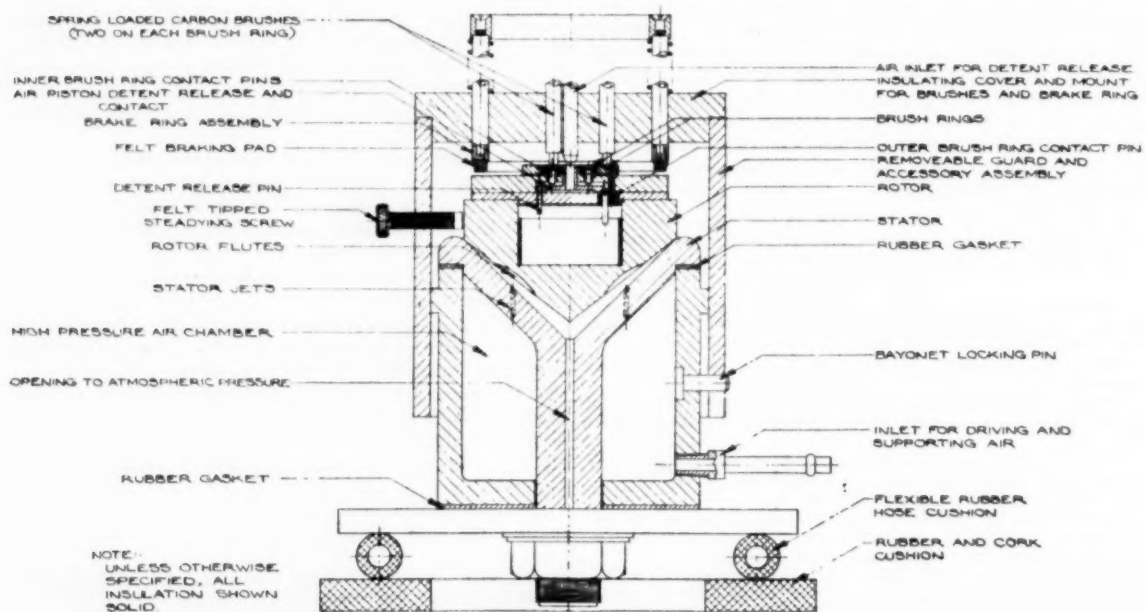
SECTIONAL VIEW OF HIGH-SPEED AIR SPINNER
